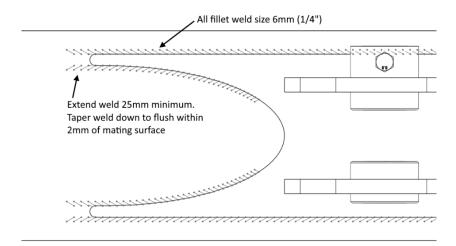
Welding instructions for the cylinder tail mount.
